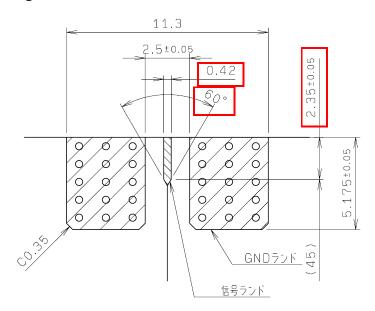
Detail of Top-side SMA End Launch Connector Pad
